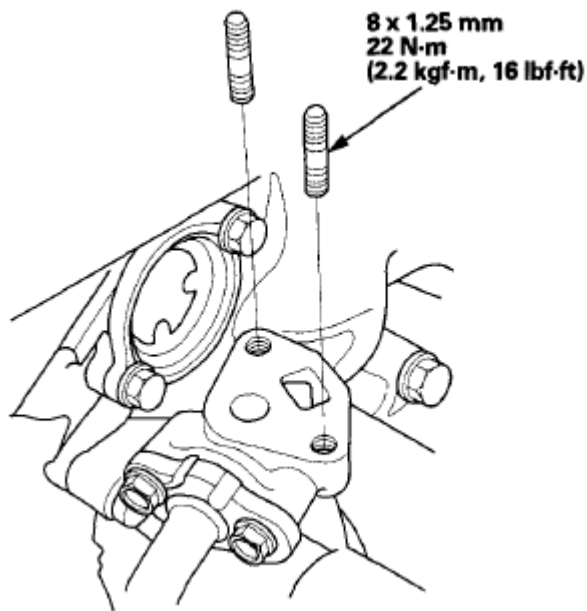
Removing EGR Valve Stud Bolts With Torque Specifications
